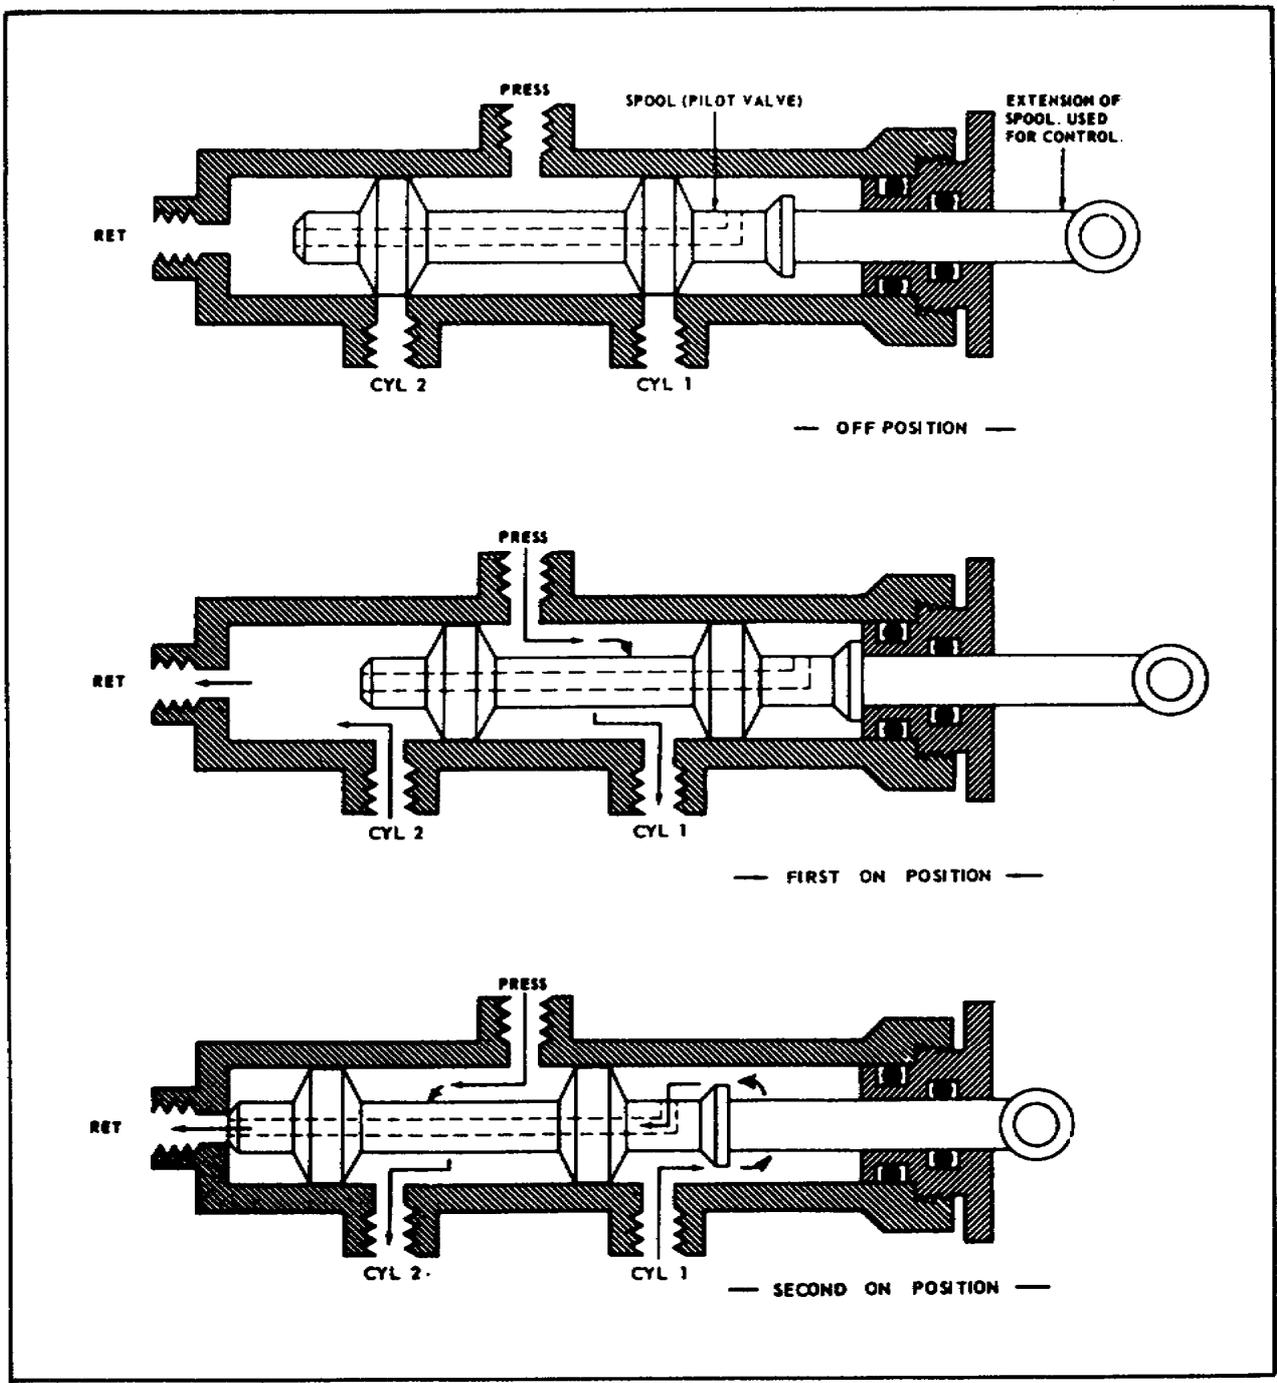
Typical Spool Closed-Center Selector Valve.
